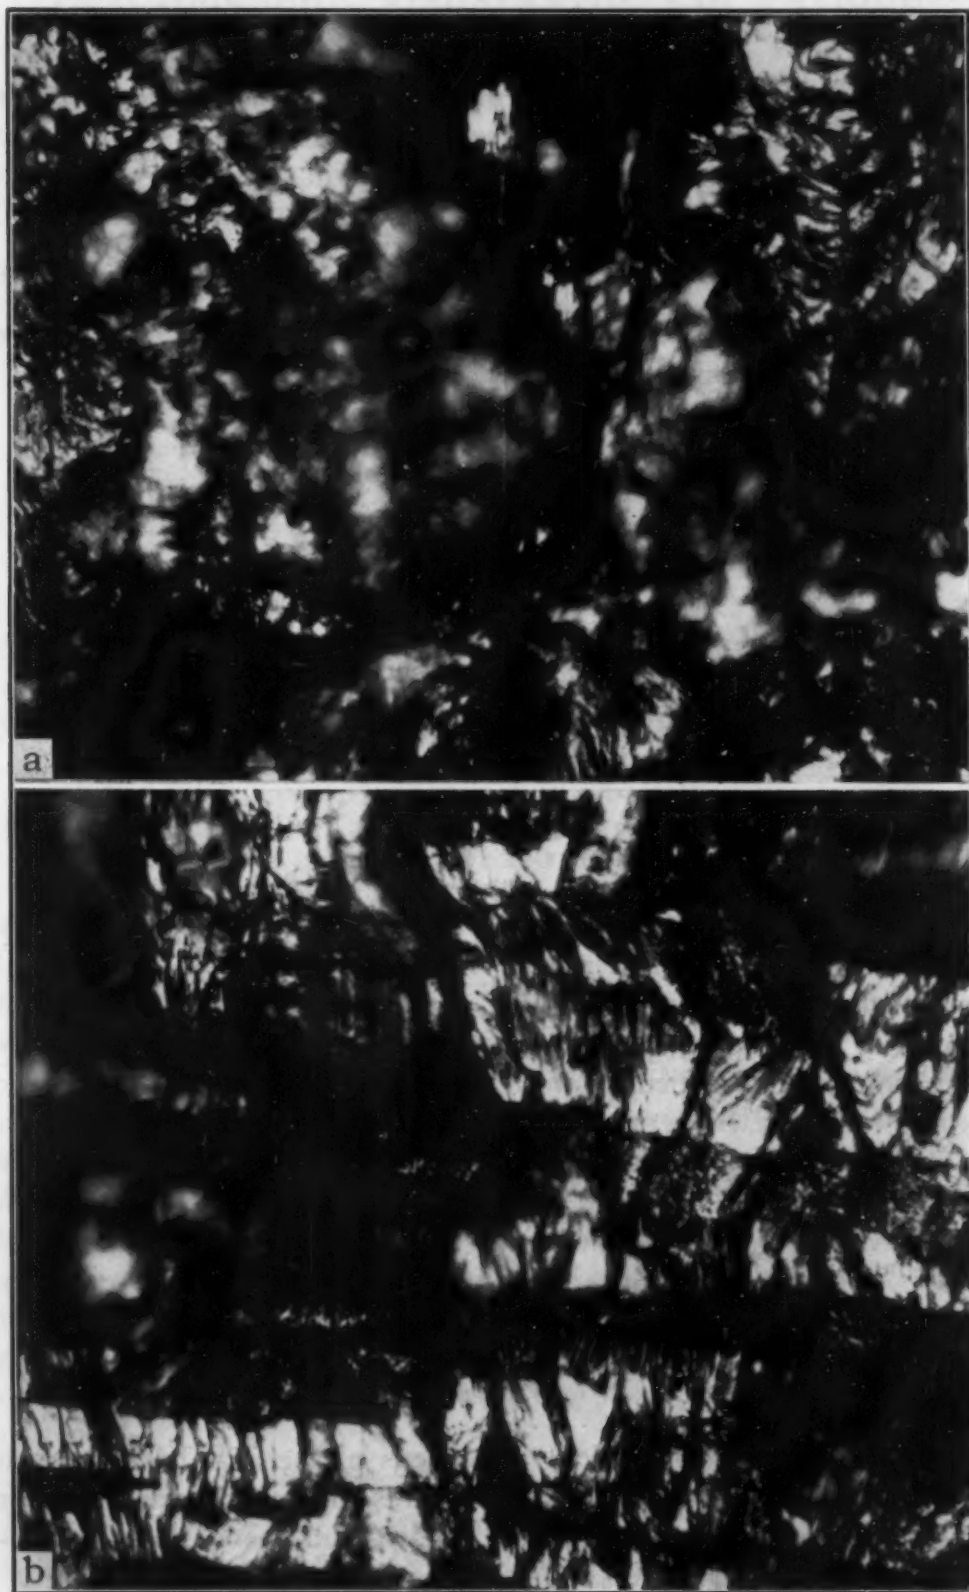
Fractographs of Fatigue Fractures in 75S-T6 Aluminum Alloy, Showing Onset of Coarse Platy Pattern. (a) 18,000 cycles. (b) 336,000 cycles. Both fields  $\times 475$ .
